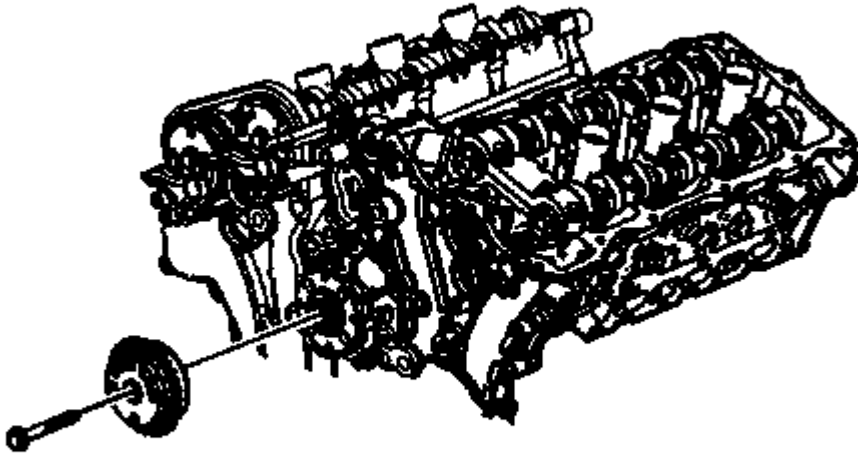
View of Left Exhaust Camshaft Position Actuator And Bolt
